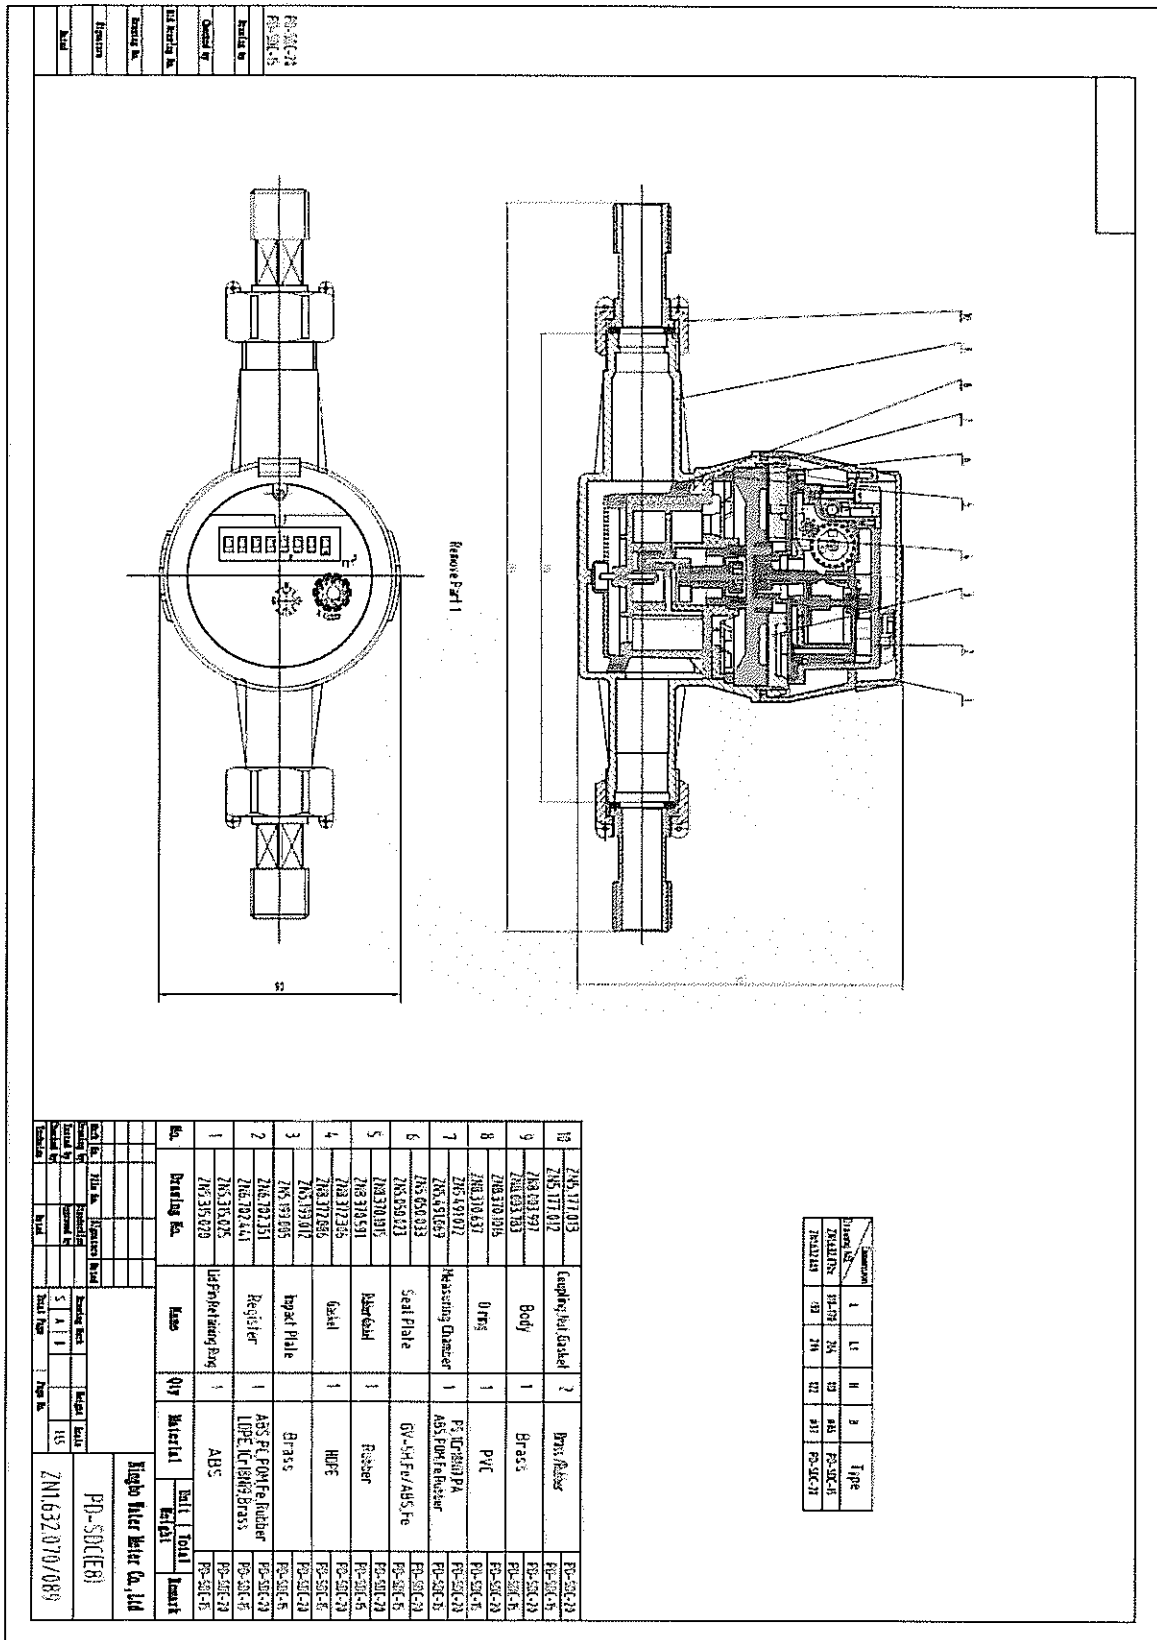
The water meter type PD-SDC (T) assembly drawings:
